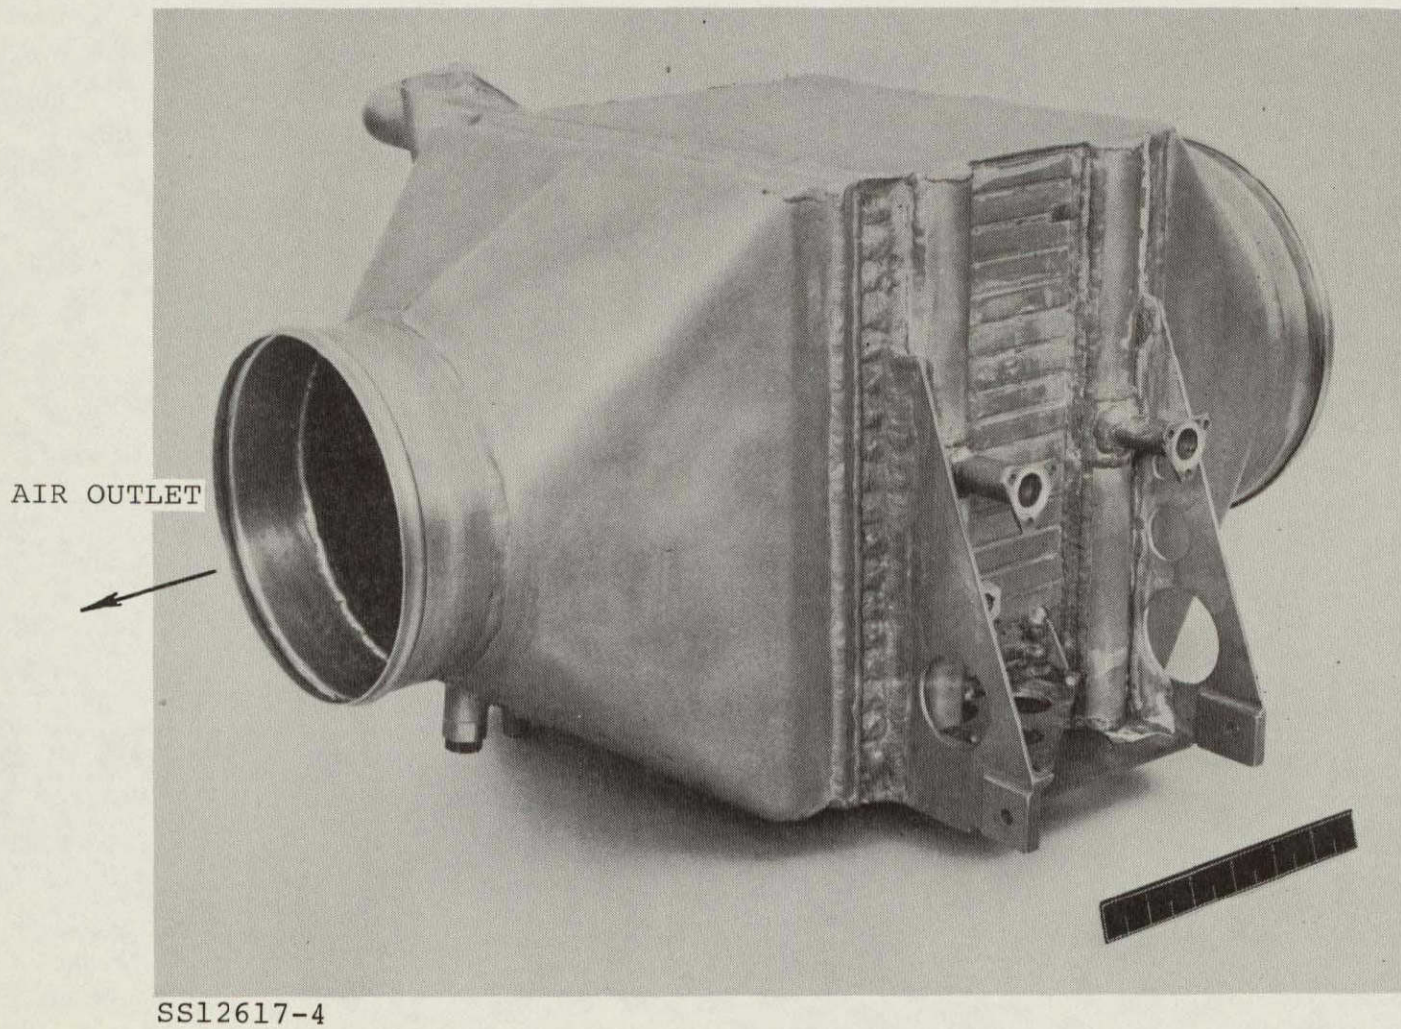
3/4 VIEW - SECONDARY SIDE
